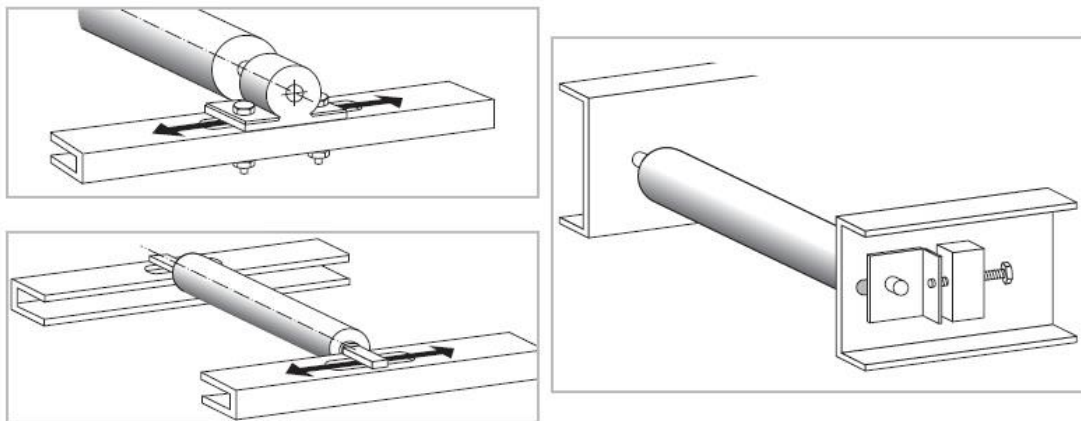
Adjustable bearing, slotted mount and belt conveyor adjustment at head or tail of conveyor
